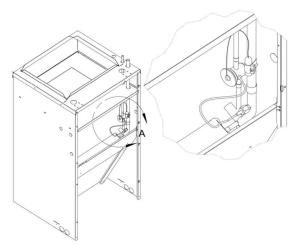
THERMOSTATIC EXPANSION VALVE INSTALLATION
